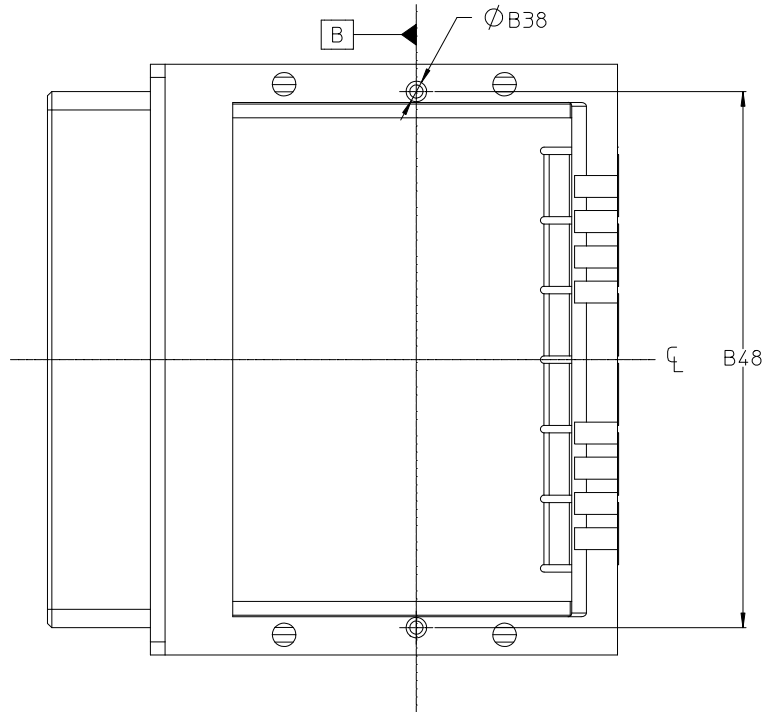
x8 EMI Guide Housing Assembly Bottom View
